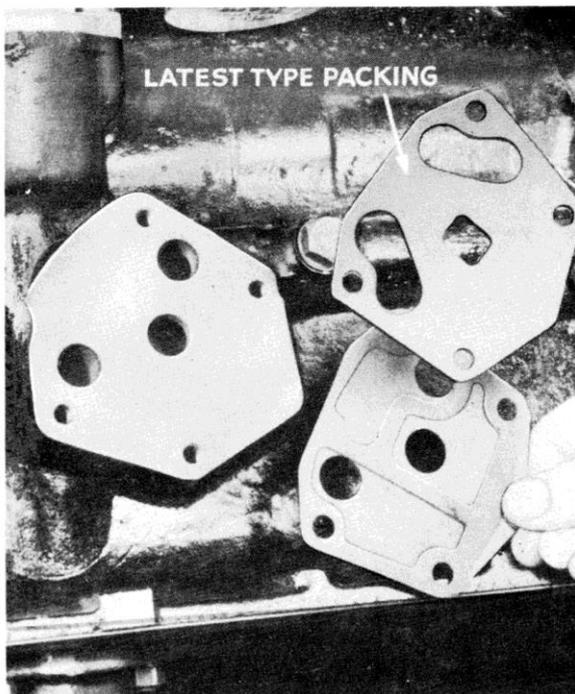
Correct fitting position for oil cleaner packing washer. The latest type of packing the fitting of which is fool-proof, is inset
